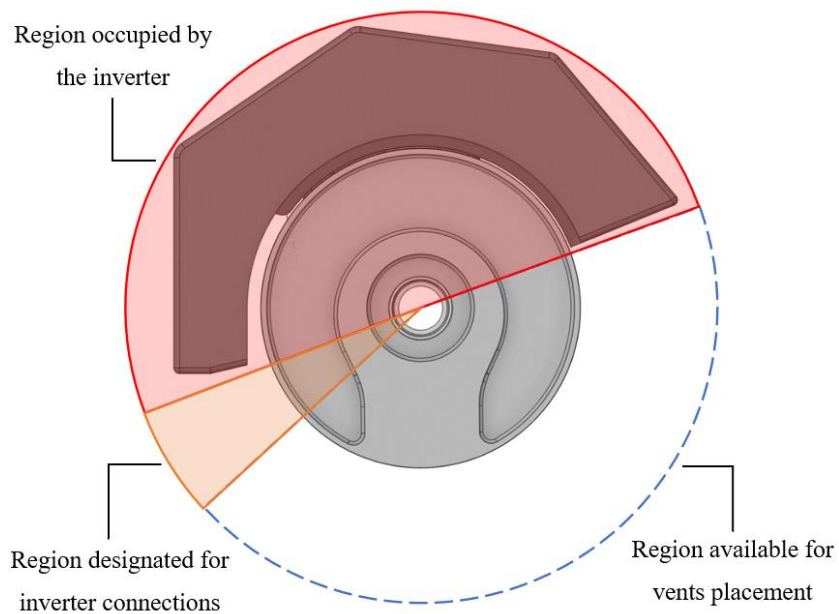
Machine-inverter modular assembly and limitations on rotor enclosure geometry.
